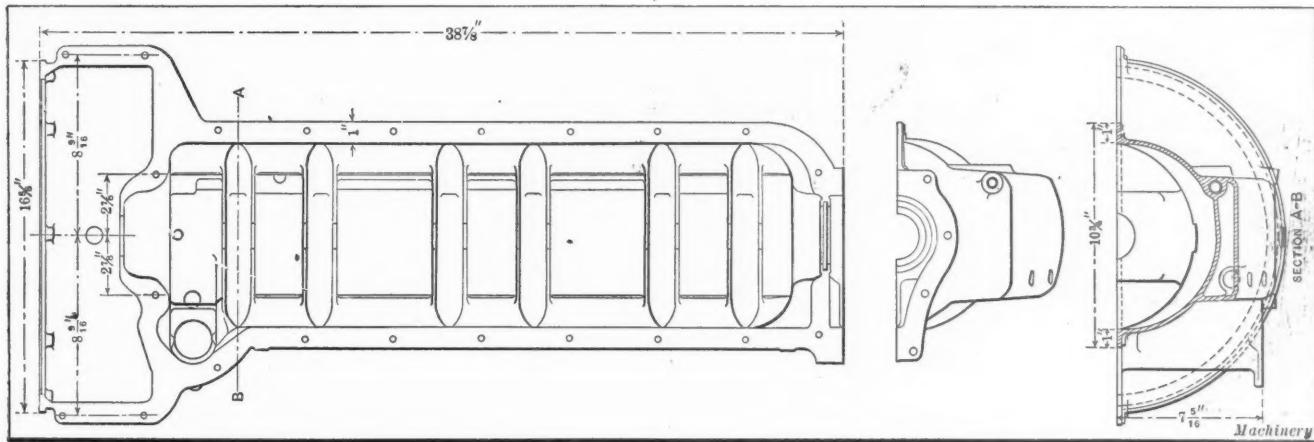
Design of Lower Half of Crank-case for Buick Motor Car
